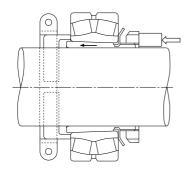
Removal of Adapter with Stop and Axial Pressure
